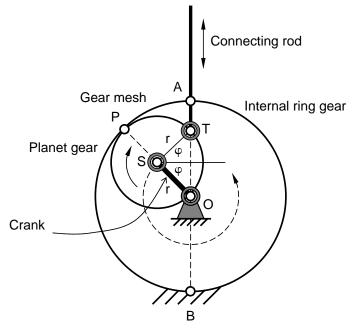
Operating principle of the cardan gear mechanism.
